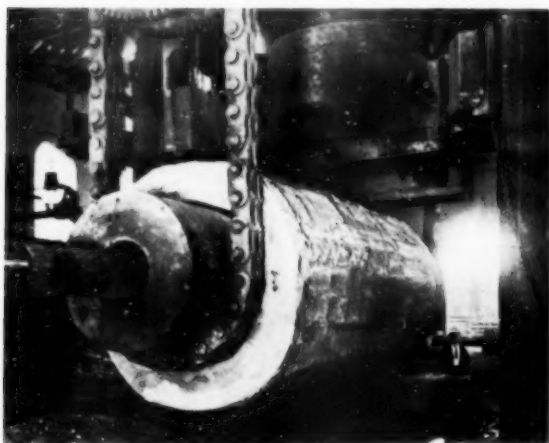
Forging a vessel with the aid of an 8,000-ton press.
